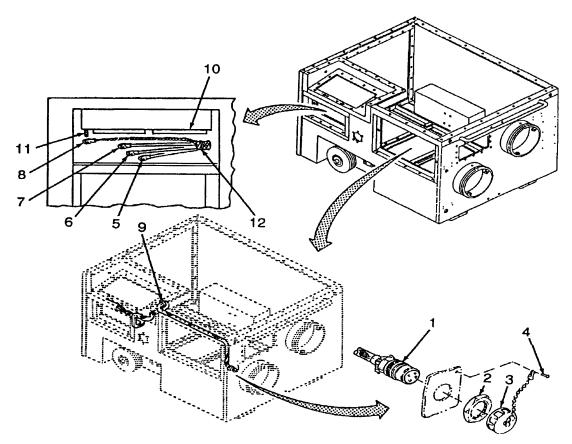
Frame Assembly Assembly (Sheet 1 of 2)
